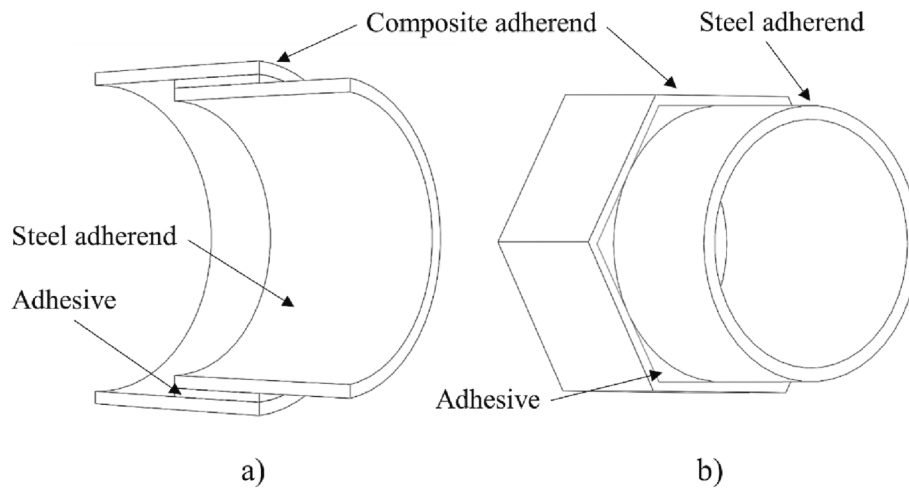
3D drawings showing cross sections of a) a circular single lap joint and b) a hexagonal single lap joint.
